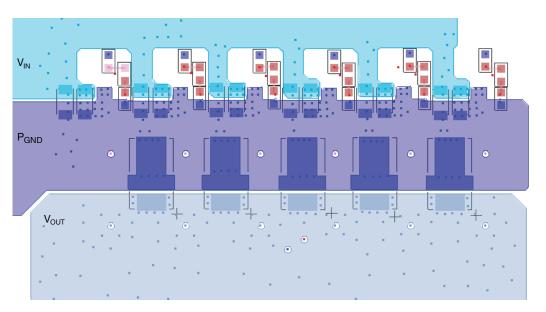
Multi - Phase VRPower Layout Bottom View
